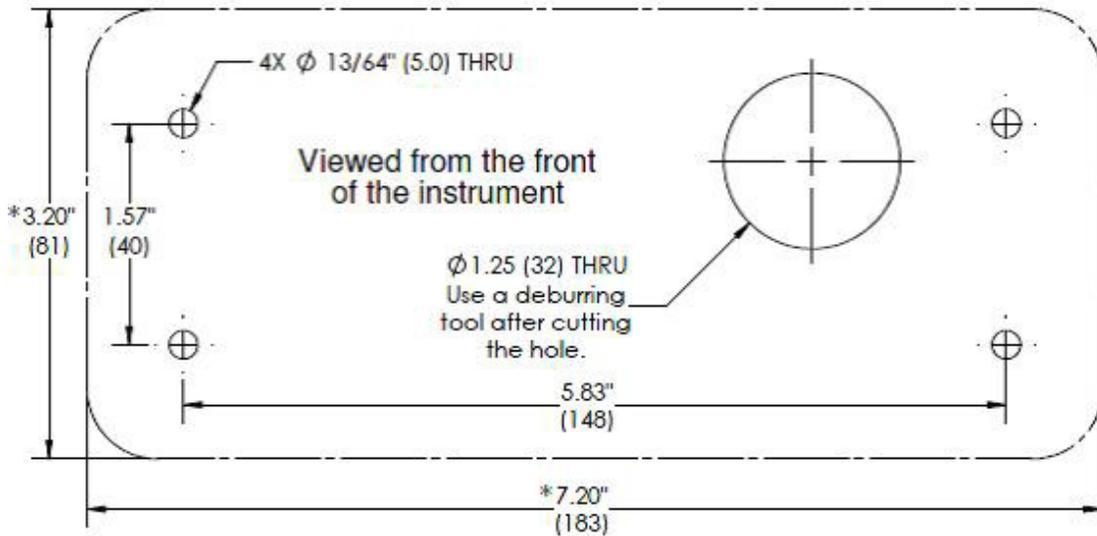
Panel Hole Dimensions (Not to Scale)
